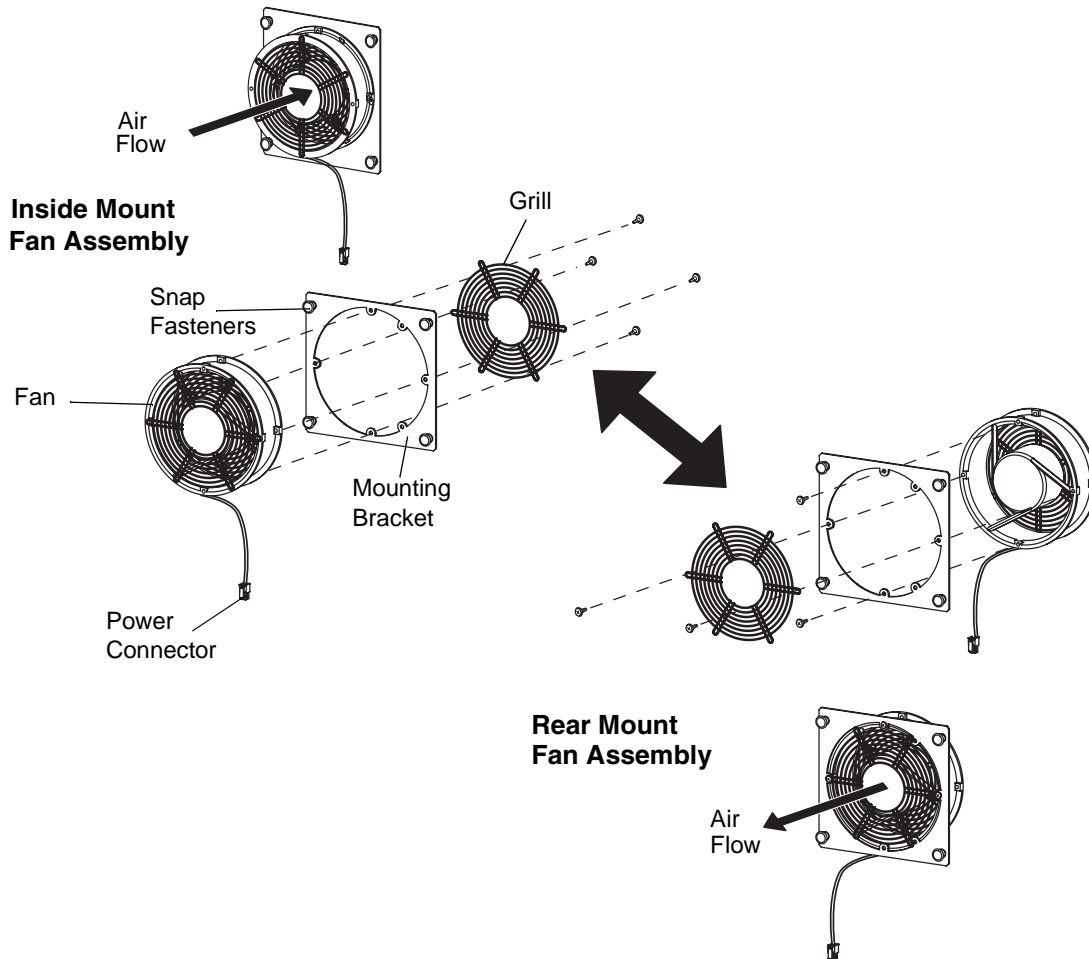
Fan Inside Mount to Rear Mount Conversion
